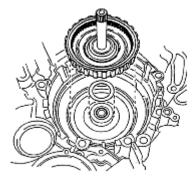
Inspecting Print Mark Of All Drive Plates Courtesy of MAZDA MOTORS CORP.
